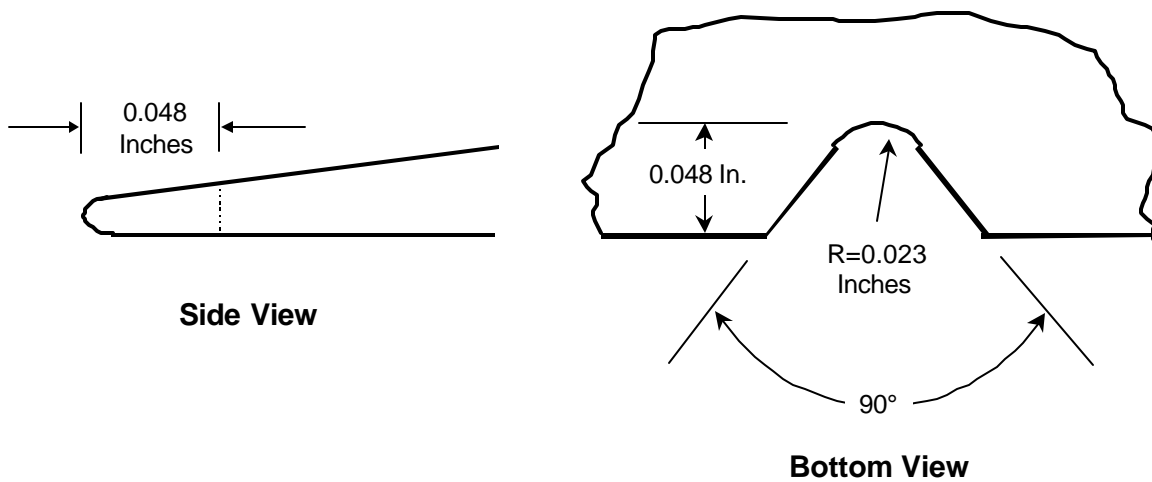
C.7. Dimensions of the 90° machined notch in the sharp LE specimens.
